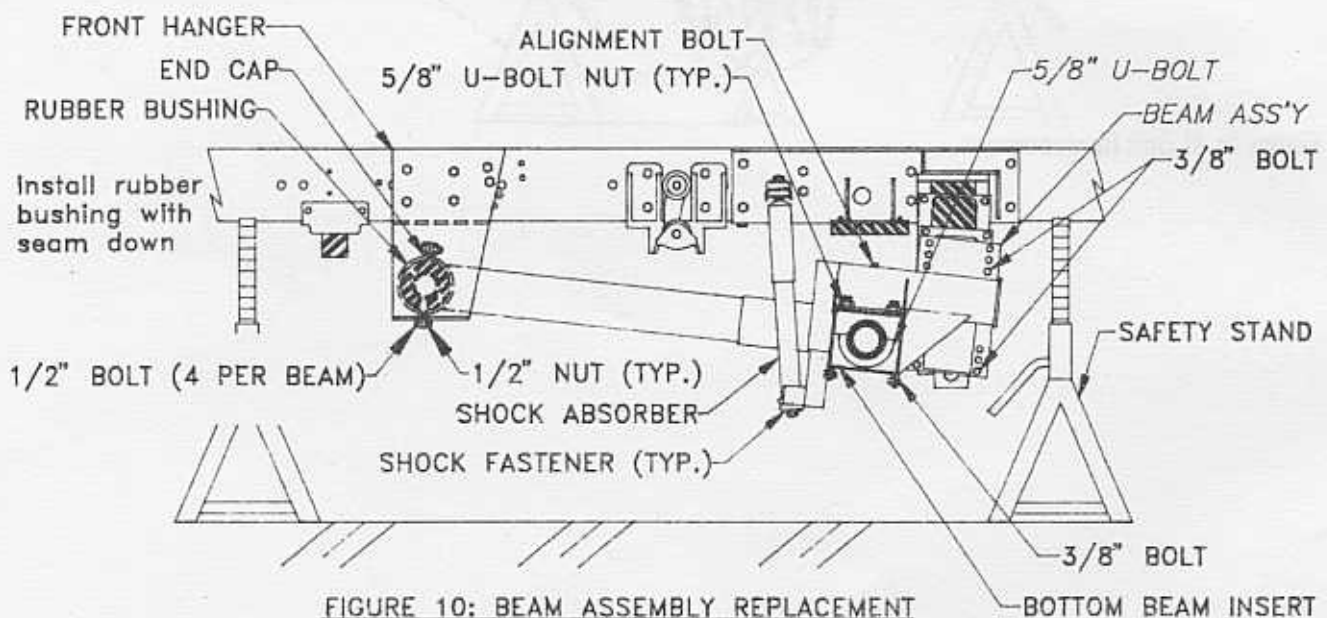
BEAM ASSEMBLY REPLACEMENT
